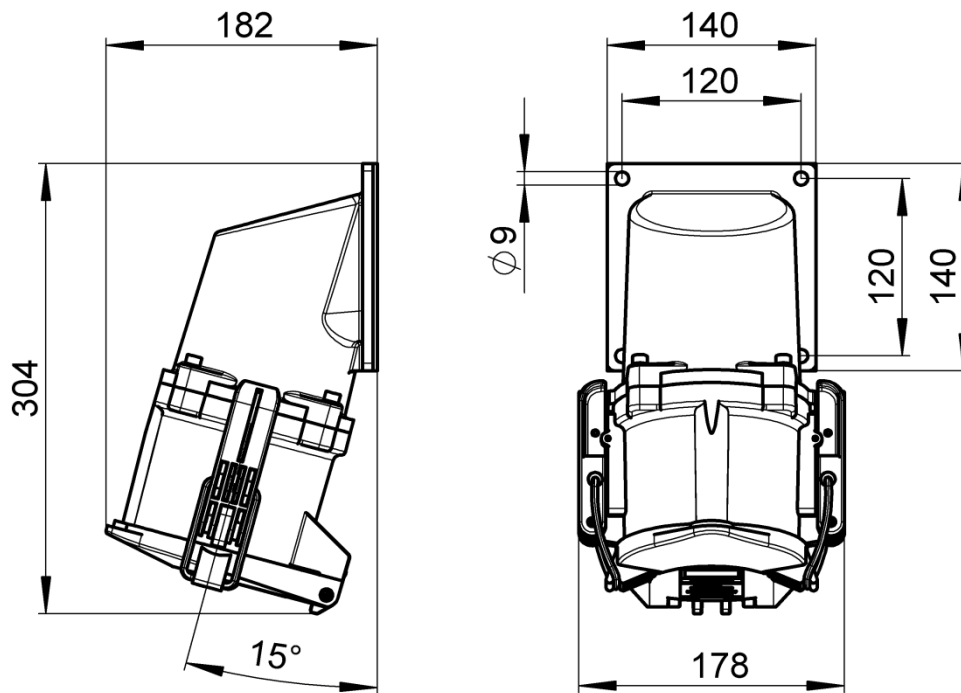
Dimensions Female Connector Panel (Angled) FCPA D-Line, C-Line (160A – 250 A) in mm
